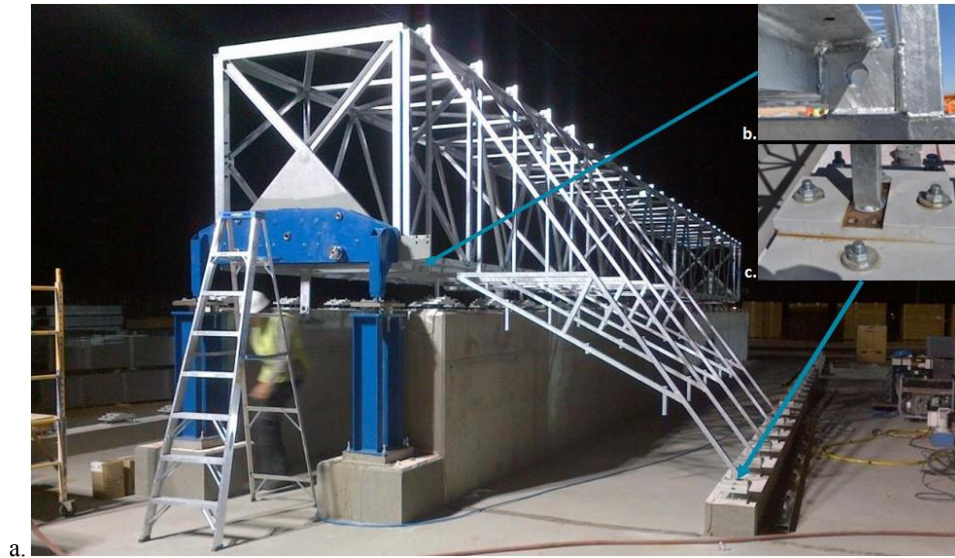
Assembly of cantilever arms in the SCE Jig: a. SCE Jig with assembled box and first cantilever arms in place; b. arm connection in oversized holes; c. support of cantilever arms
